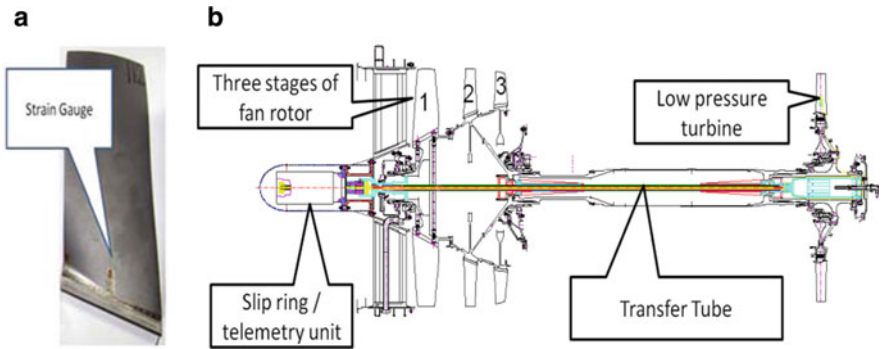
a Fan rotor blade strain gauge. b Fan rotor blade strain gauge and rotating instrumentation arrangement. *Courtesy* GTRE
